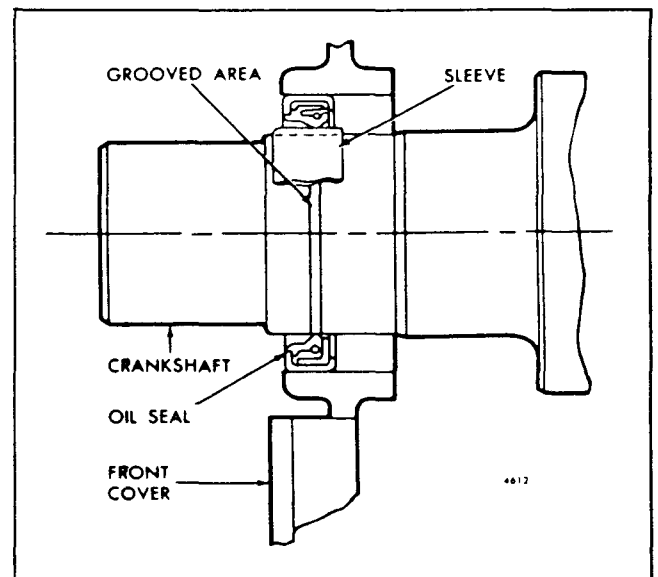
Use of Front Oil Seal Sleeve on Grooved Crankshaft (In-line or V Engines)
